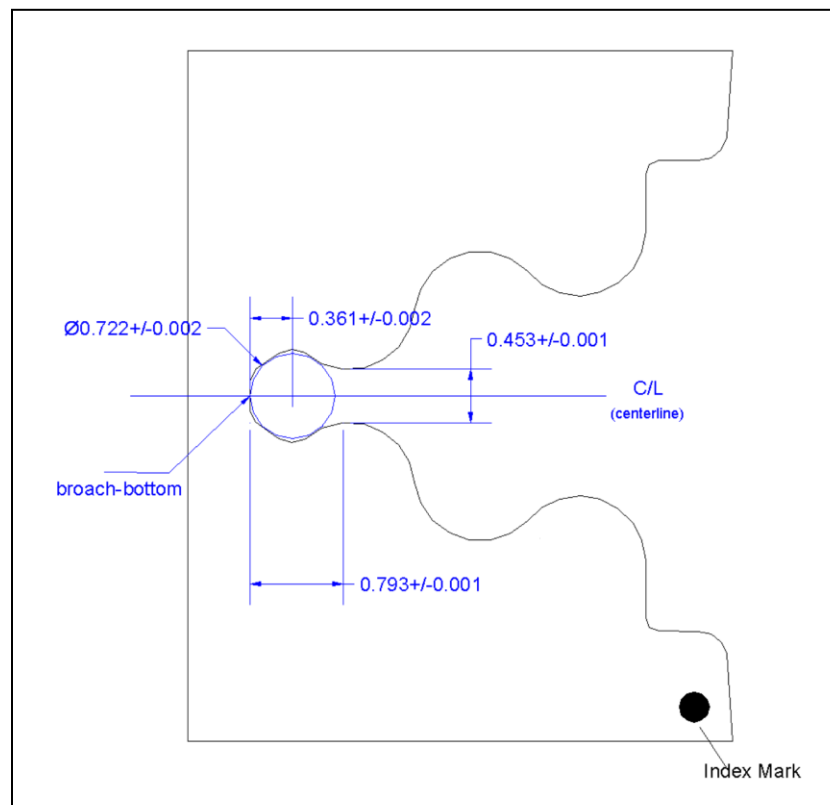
Dimensions that assist the EDM Team in locating EDM notches
